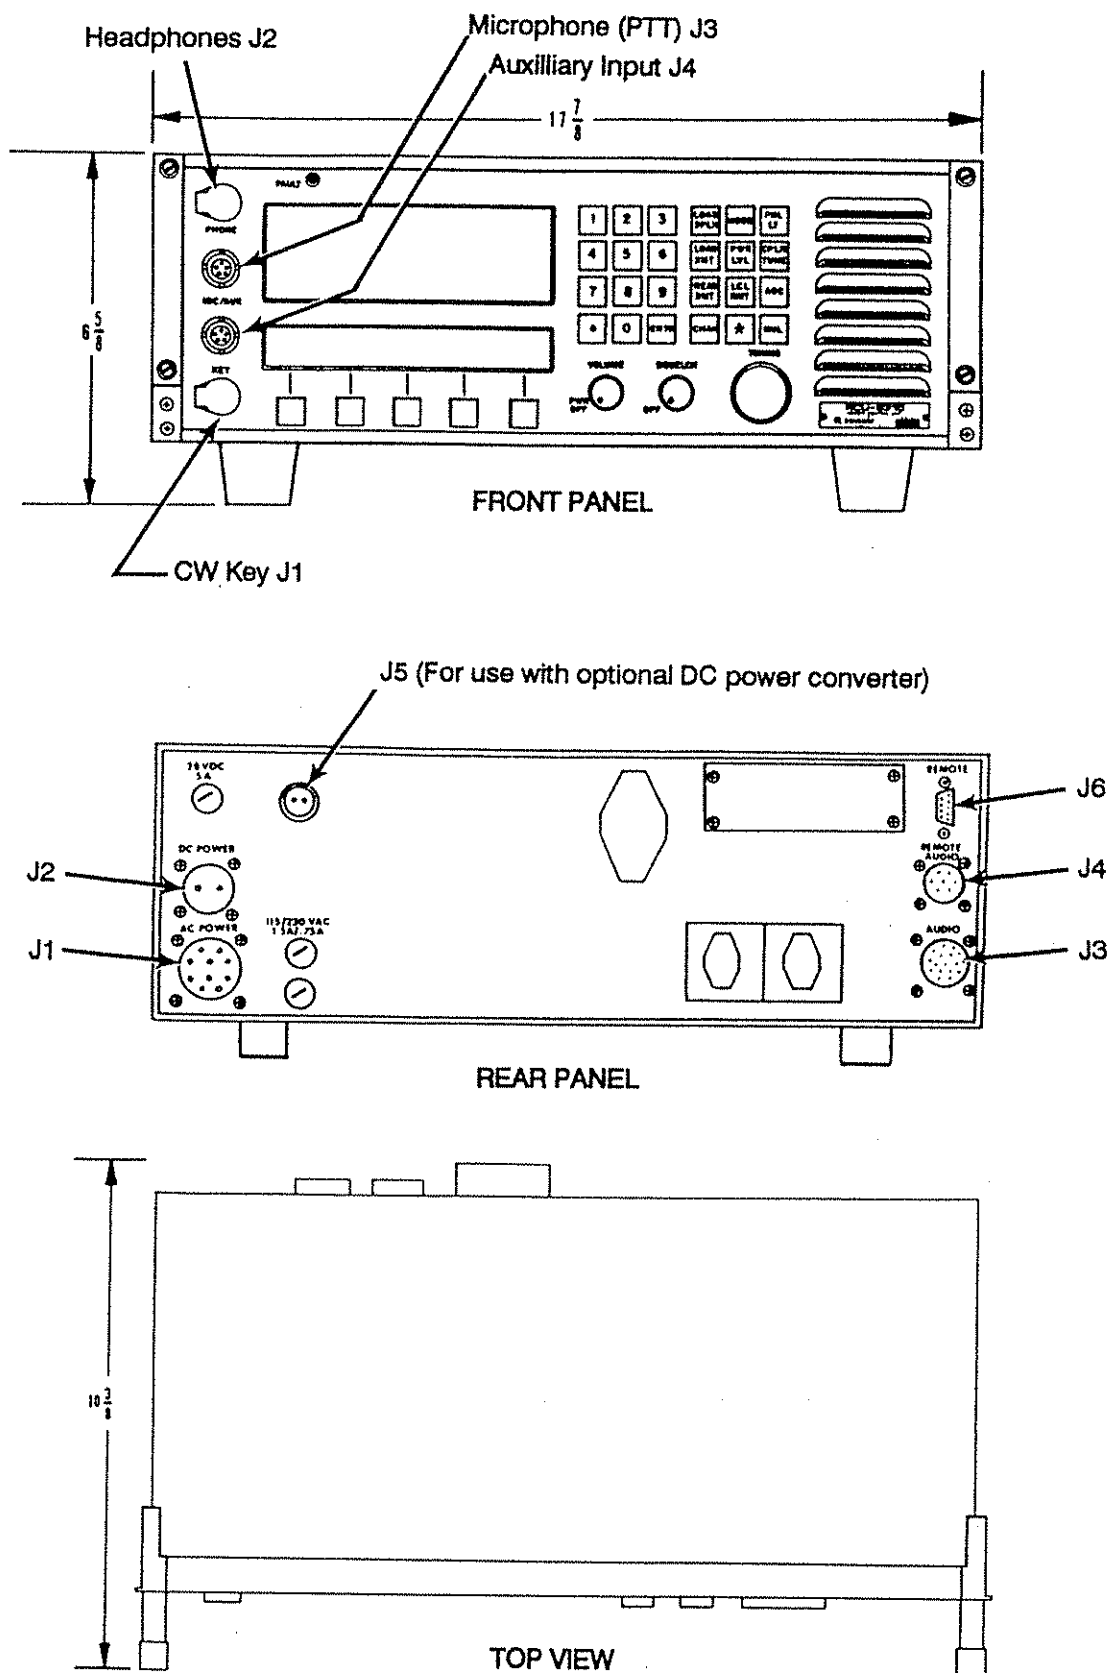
RCU-9310 Outline Dimensions and Connector Locations.
